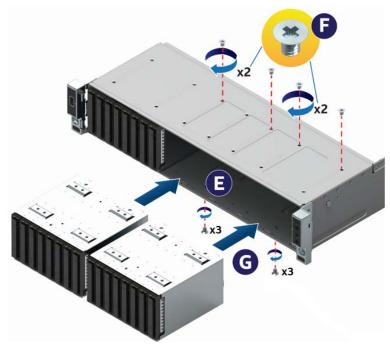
Installing the 8 x 2.5" Drive Bay Module(s)
